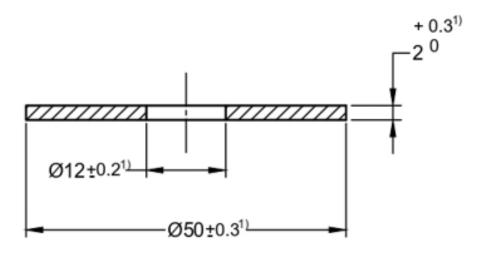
A FOOT VALVE ASSEMBLY PART (CONTINUED)
